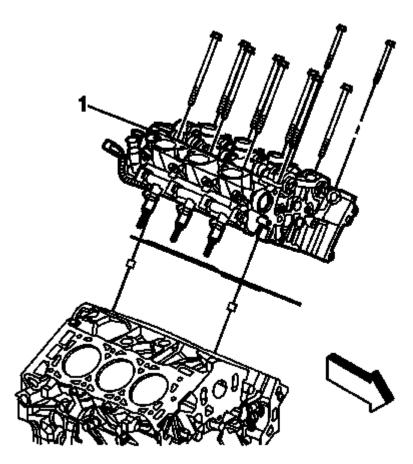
Identifying Cylinder Head and Exhaust Manifold Assembly Courtesy of GENERAL MOTORS COMPANY
